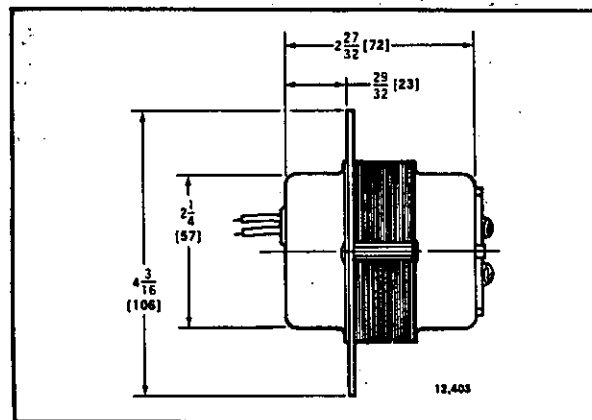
AT72D DIMENSIONS IN in. [mm IN BRACKETS] WITH SECONDARY SCREW TERMINALS; 4x4 in. PLATE MOUNTING WITH PLATE MOUNTED AT THE LAMINATIONS.
